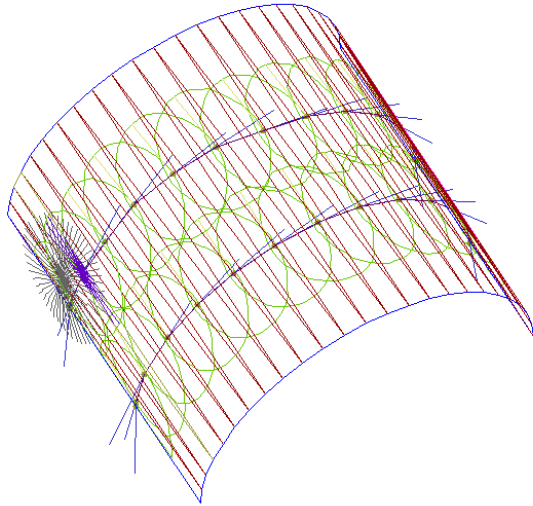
Tool paths on a cylindrical surface machined from the convex side
